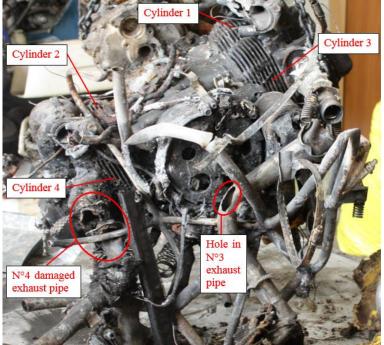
backside of the engine showing damage to the rear exhaust pipes
